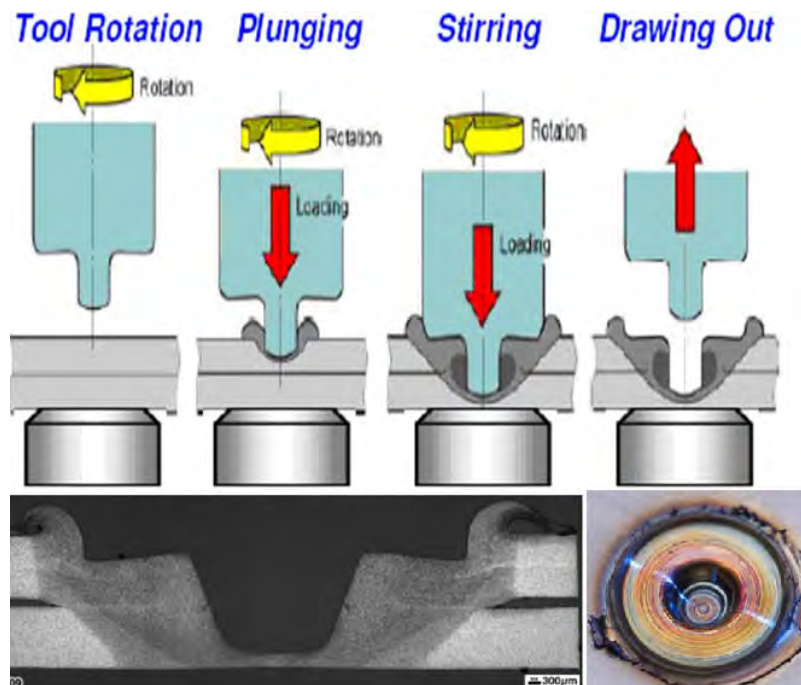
L-5: Process steps for friction stir spot welding (top) with the resultant weld profile (bottom).⁰⁻²
